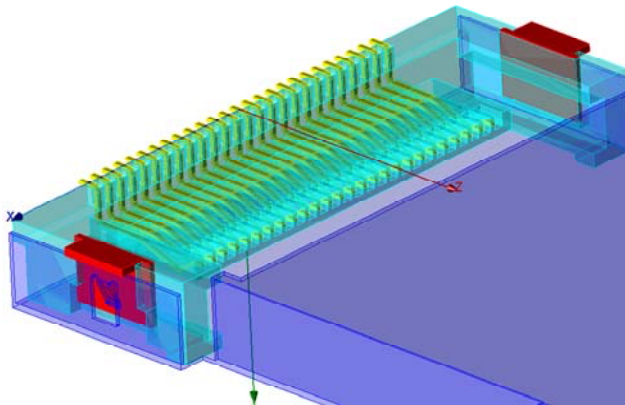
Configuration of the connecting pieces between the card reader and board on which the card will set.
